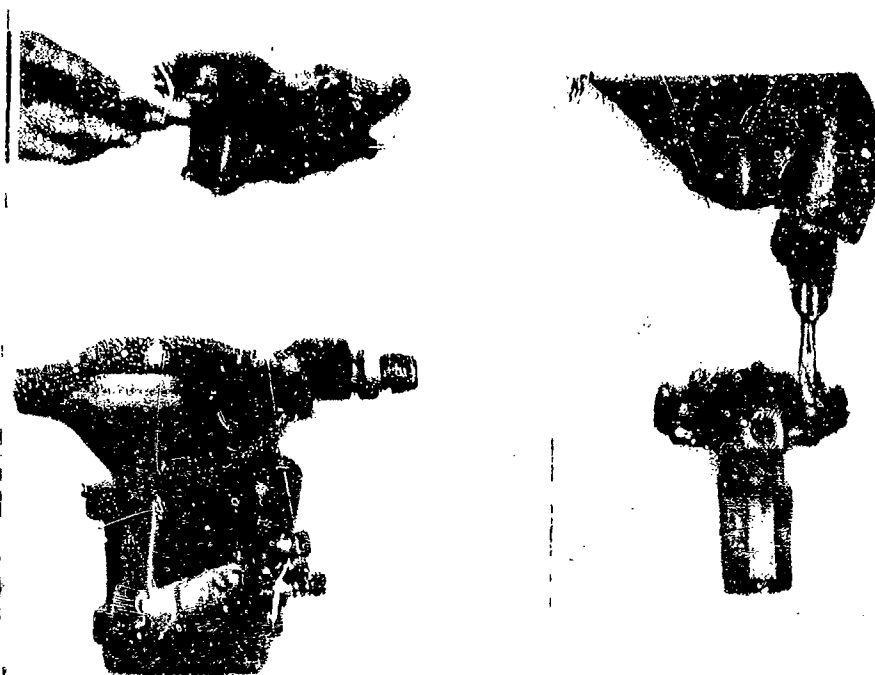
Disassembly of the engine revolution governor diaphragm mechanism.
